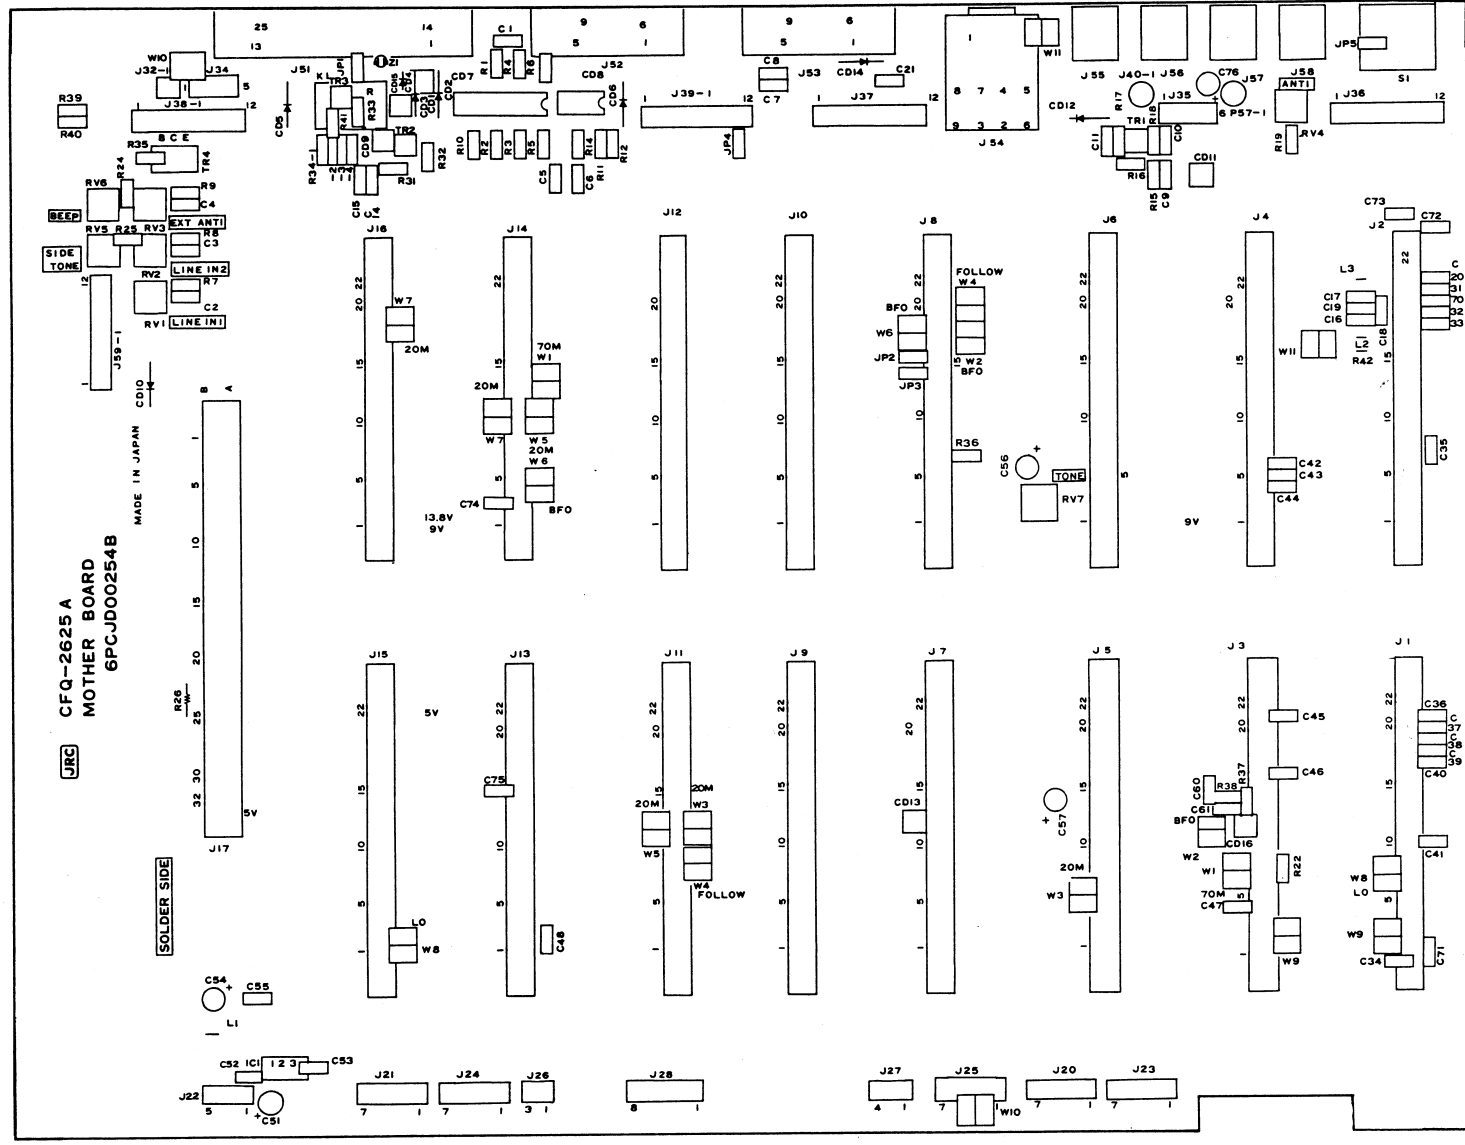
MOTHER BOARD CFQ-2625A Component Layout
